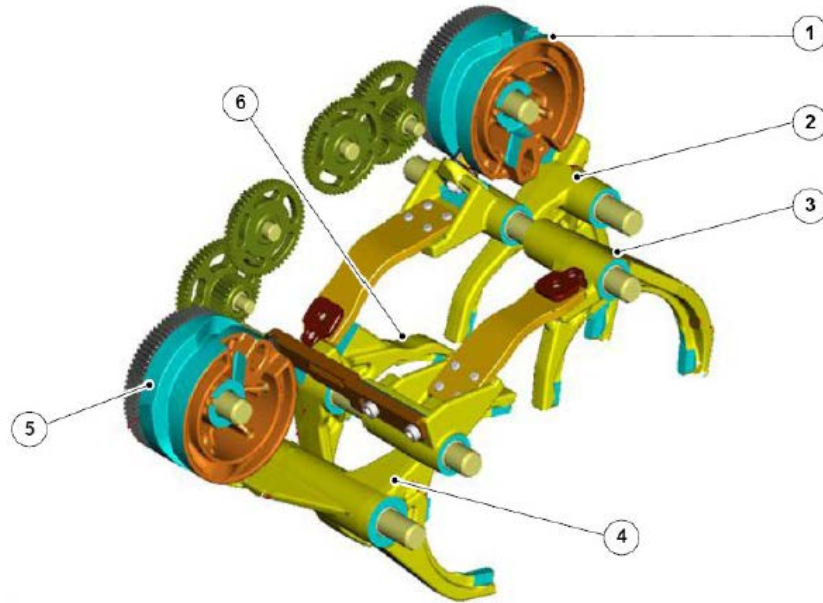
Gear selector system design of a DCT (Ford-Werke GmbH).
